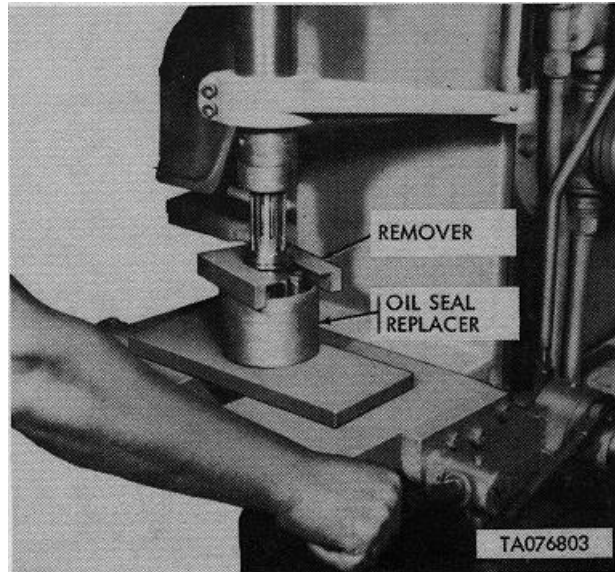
Gear Bearing Removal Using Remover with Oil Seal Replacer
